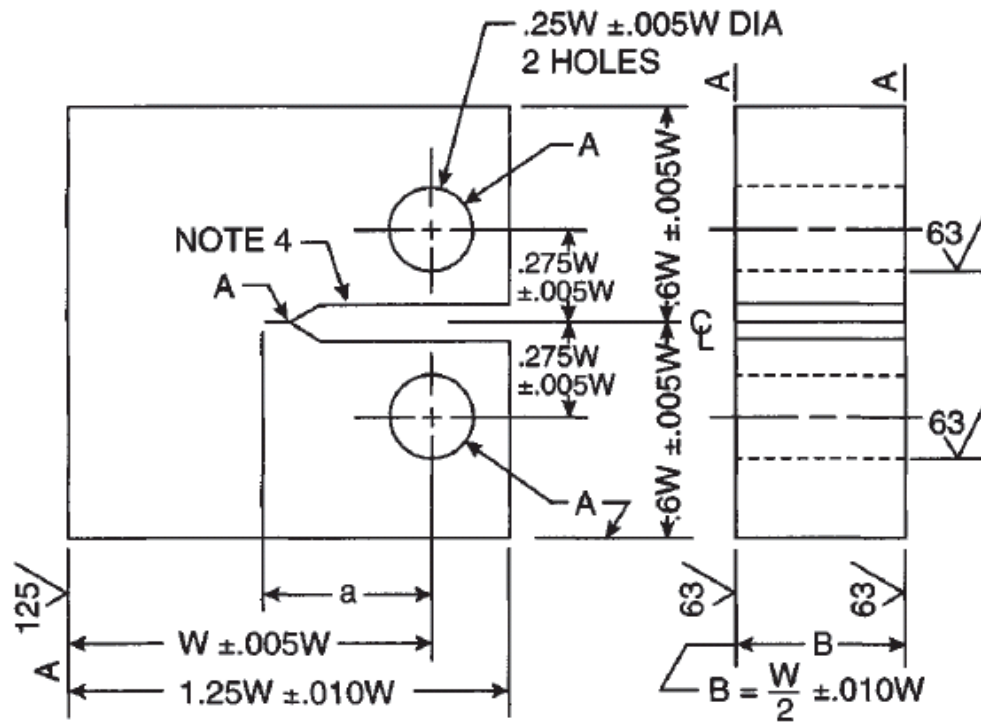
A compact tension specimen. Also referred to as single edge notch tension (SENT) specimen<sup>60</sup>
